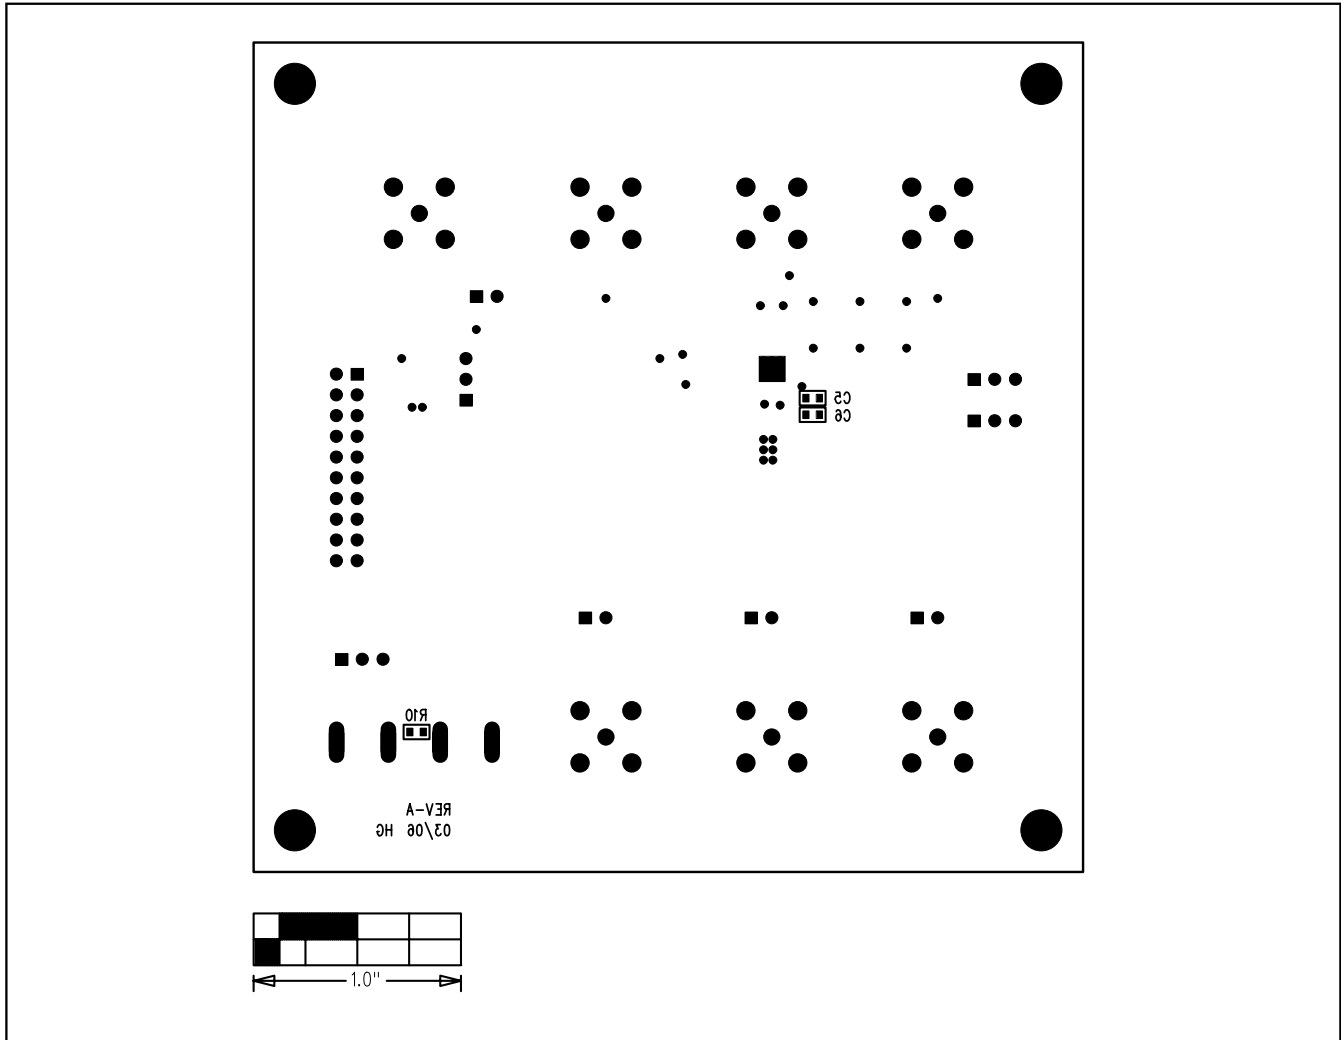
MAX7470 EV Kit Component Placement Guide—Solder Side
